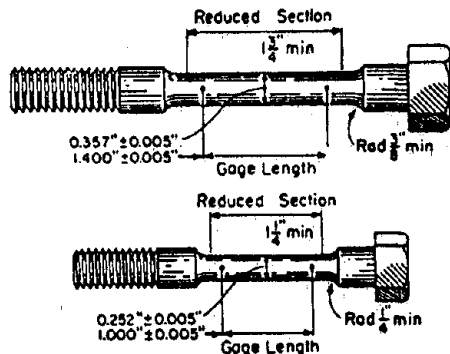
Examples of Small-Size Specimens Proportional to Standard 2-in. Gage Length Specimen
